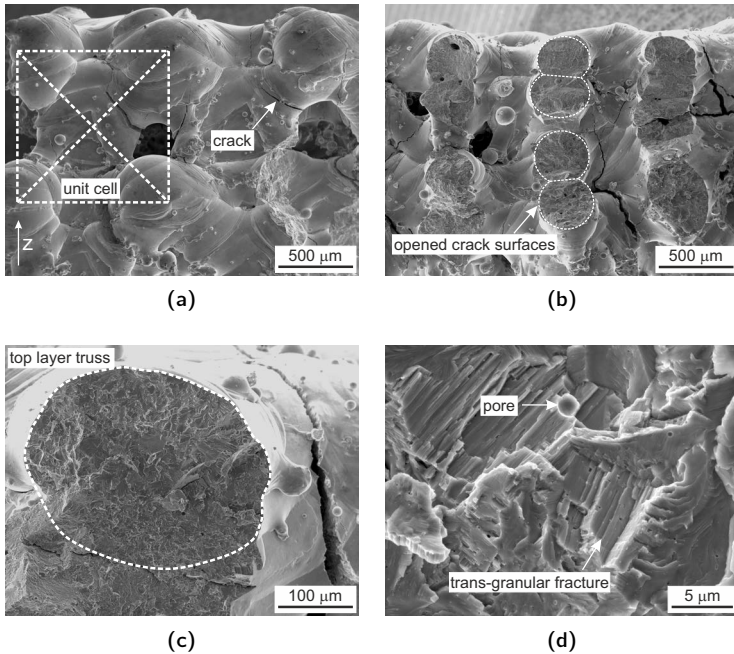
SEM micrographs of the bcc lattice produced with 150 W and 150 $\text{mm}\cdot\text{s}^{-1}$, a) side view showing the bcc unit cell and exposed nodes, b) side view after opening the existing cracks exposing the fracture surfaces, c) detailed view of a top level truss and d) the truss fracture surface. The build direction (z) is indicated.
